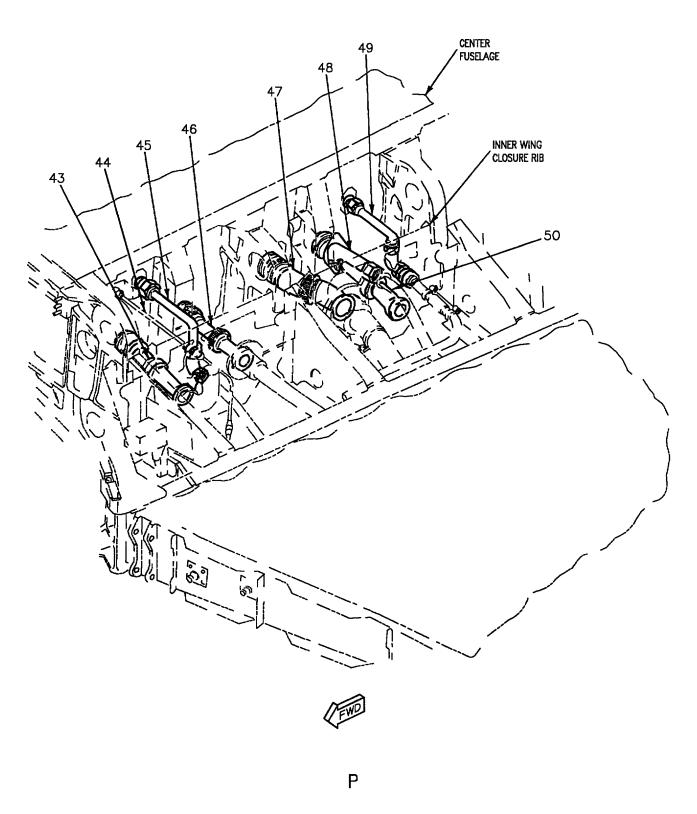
Inner Wing Removal and Installation Attachments (Sheet 9)
